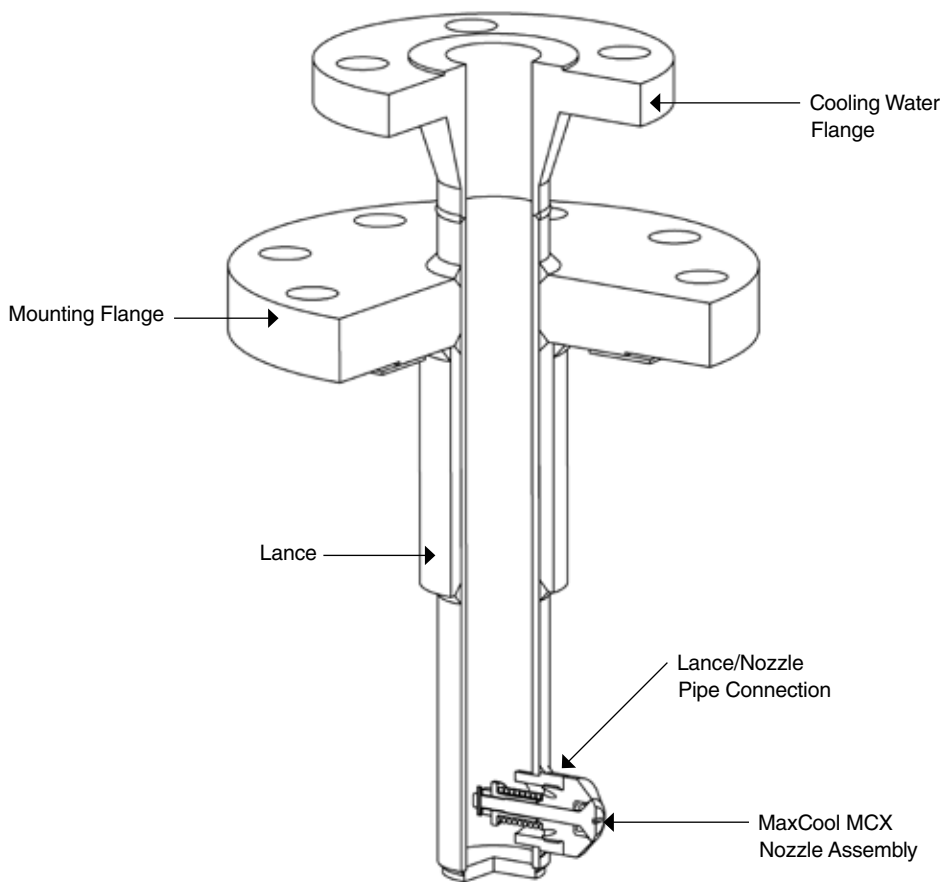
Manifold Mounted MaxCool MCX Desuperheater
